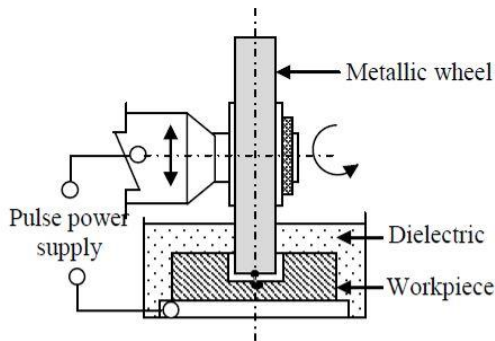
The phenomena of wheel-workpiece interaction in EDG
